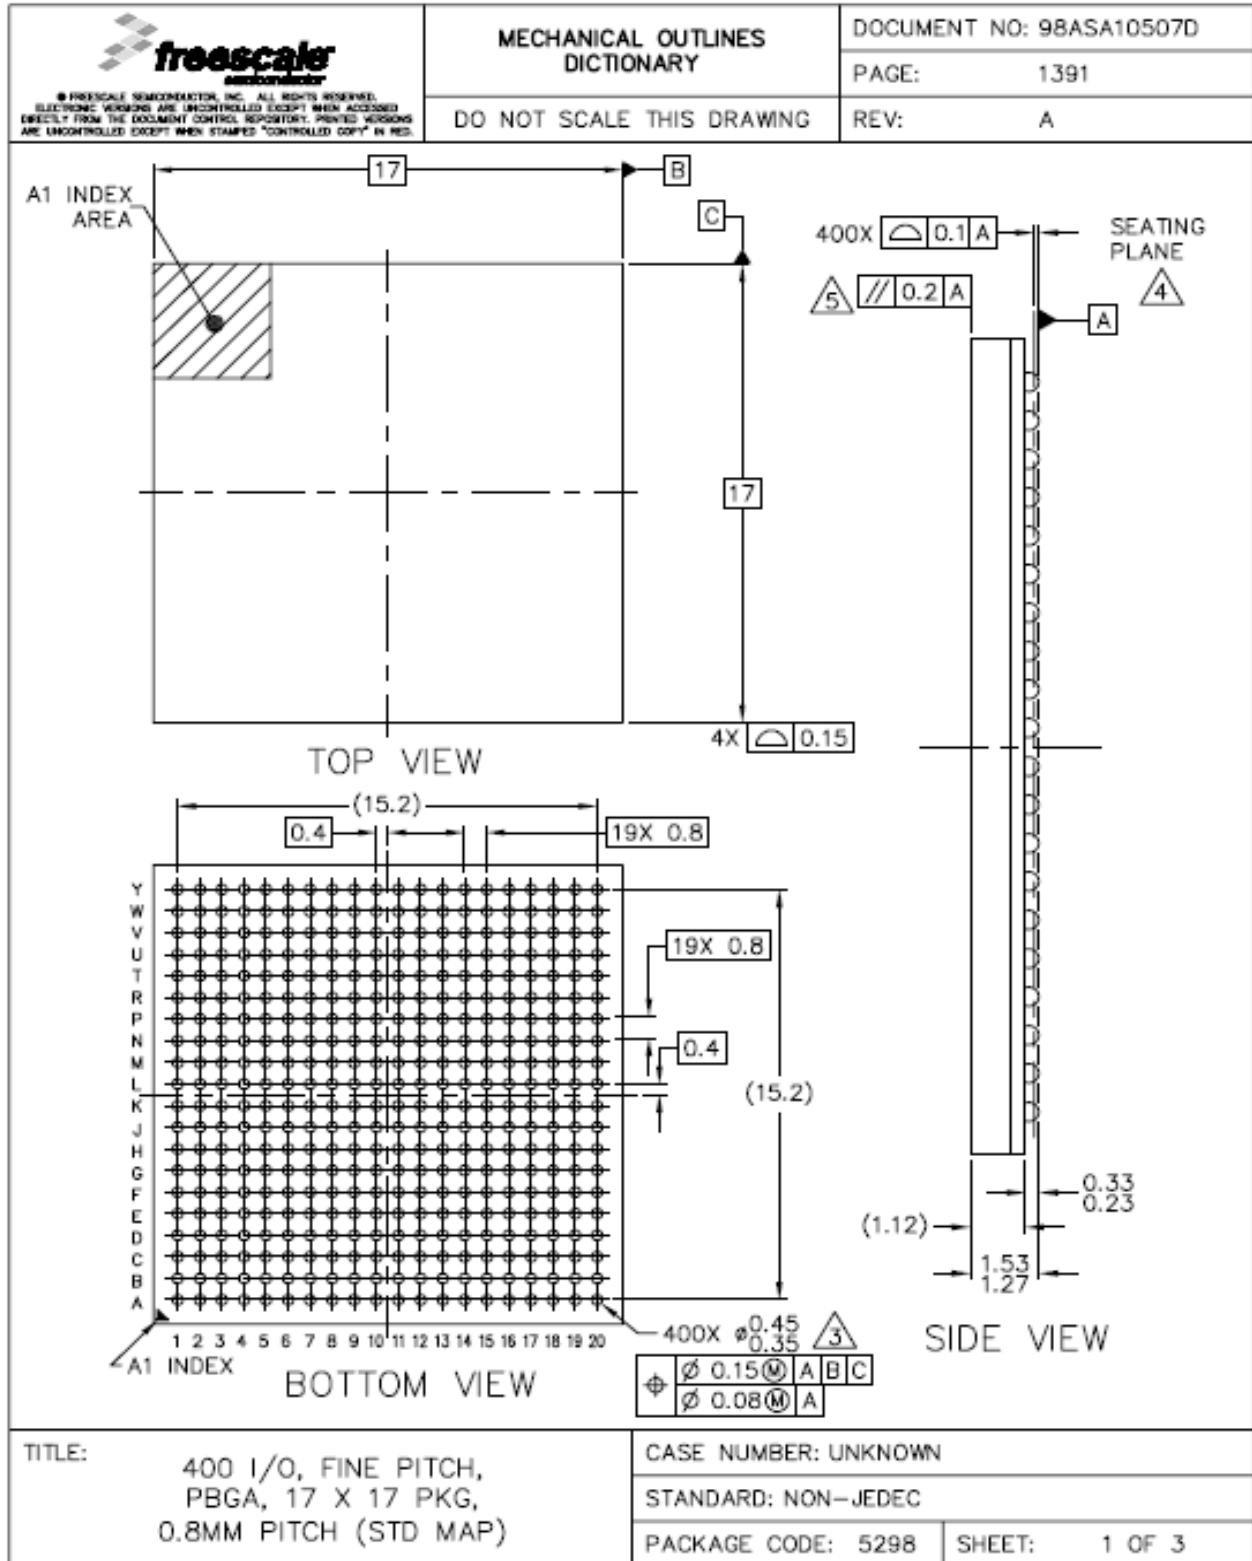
17x17 mm BGA, Case x Package Top, Bottom, and Side Views
